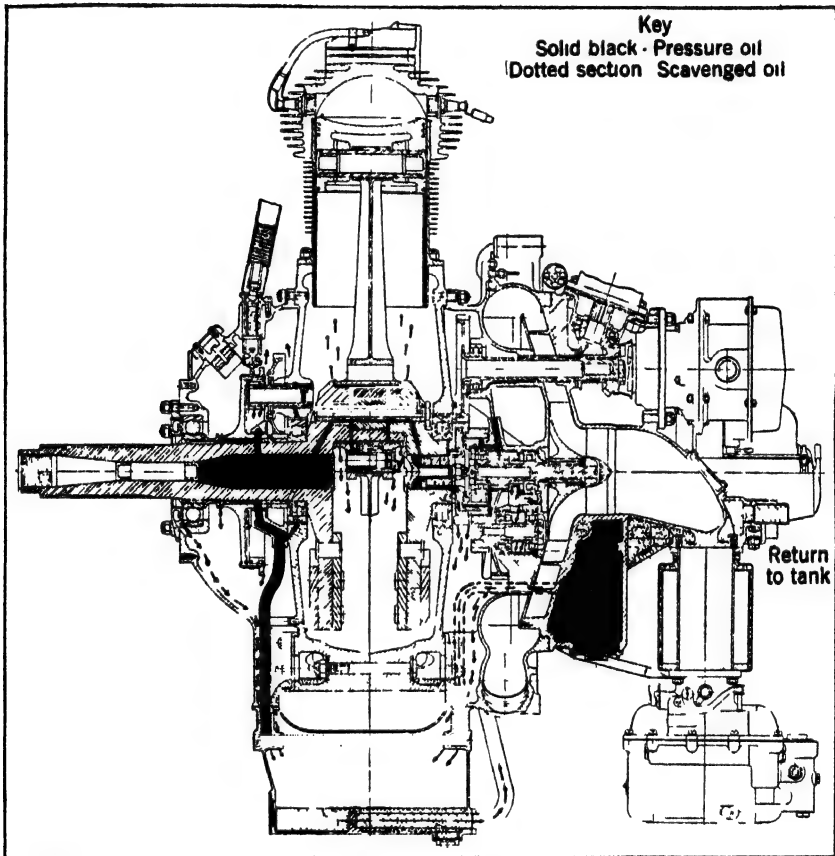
Lubrication Chart of the Pratt & Whitney “Wasp” Engine.
